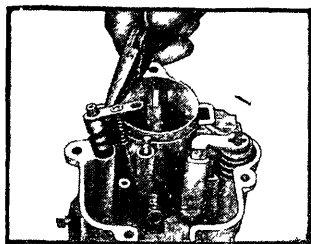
Install step-up piston, gasket, spring, and step-up piston plate and rod. Early 1935 and prior models used step-up piston in air horn (below cover) casting
